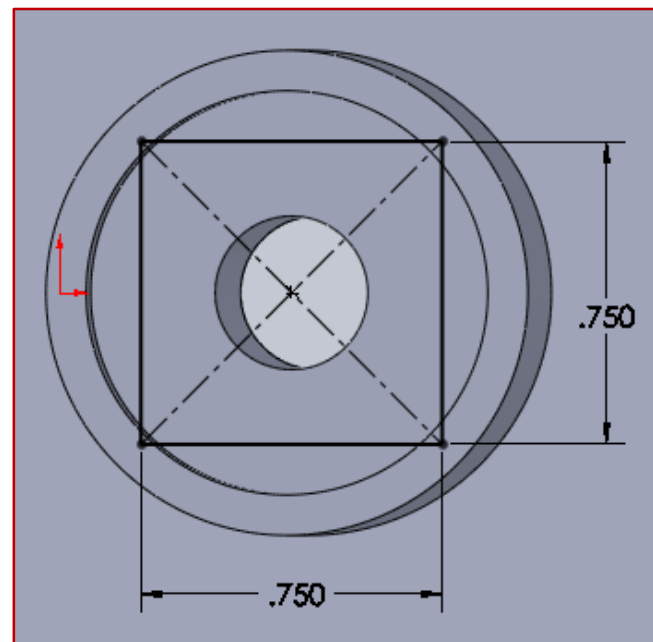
Rectangle Sketch for Bottom Pocket
